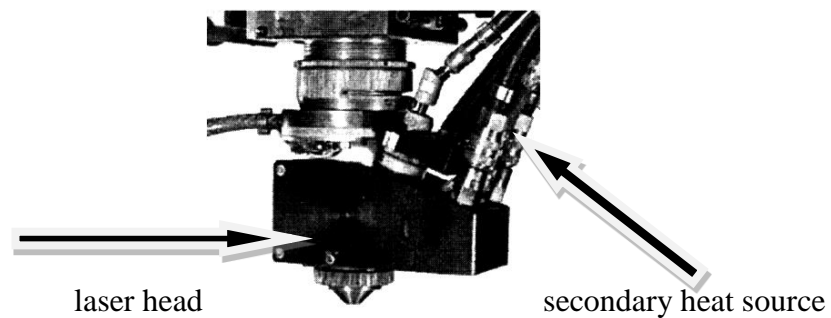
Integrated hybrid laser welding head [149]
